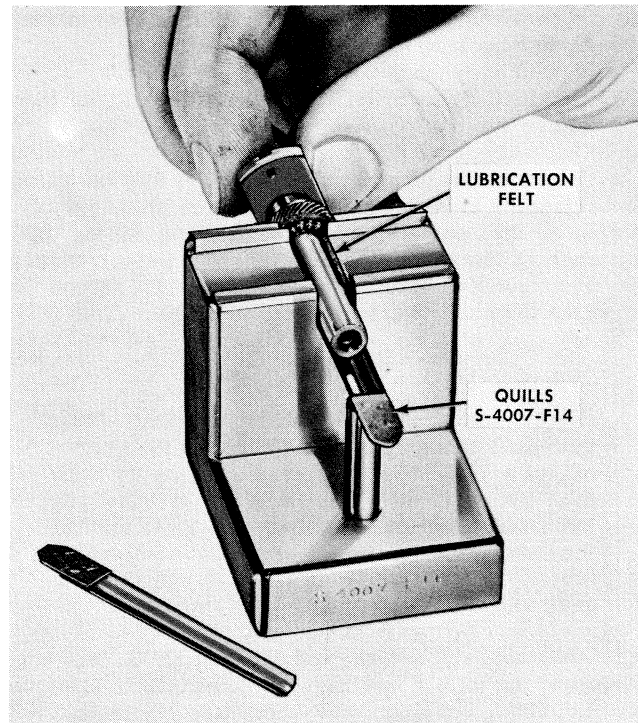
Reassembling of Counter Gear and Shuttle Shaft
